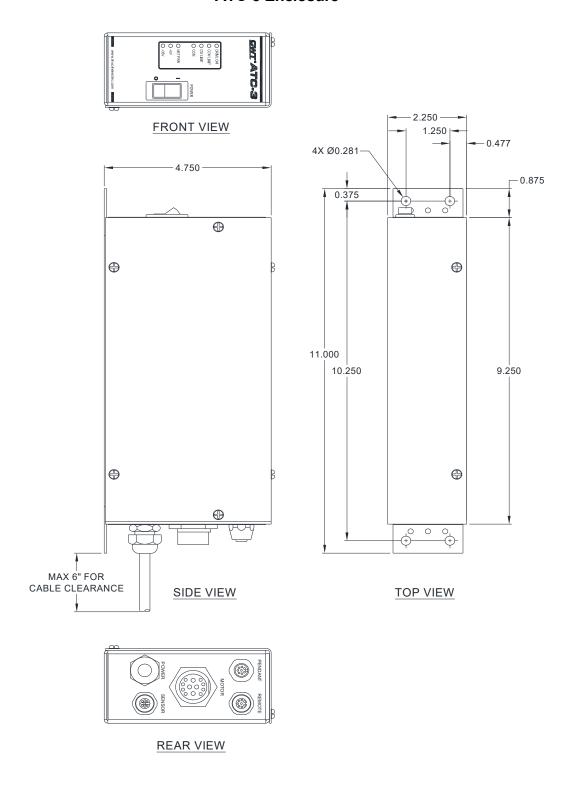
ATC-3 Control Enclosure Physical Dimensions
